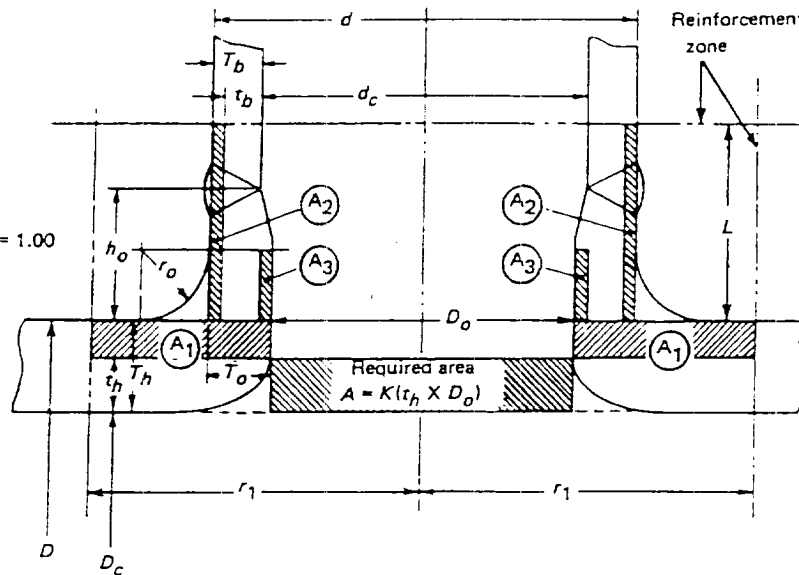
(b)(3) REINFORCED EXTRUDED OUTLETS
